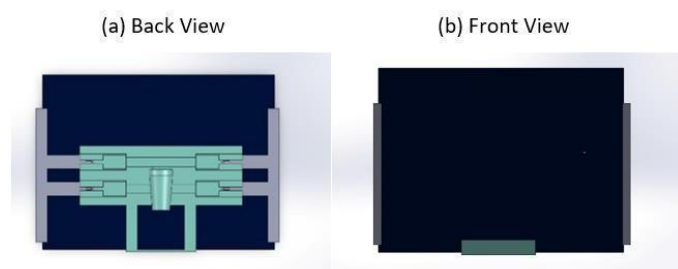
Cassette holder 3D design: (a) Backview, and (b) front view
